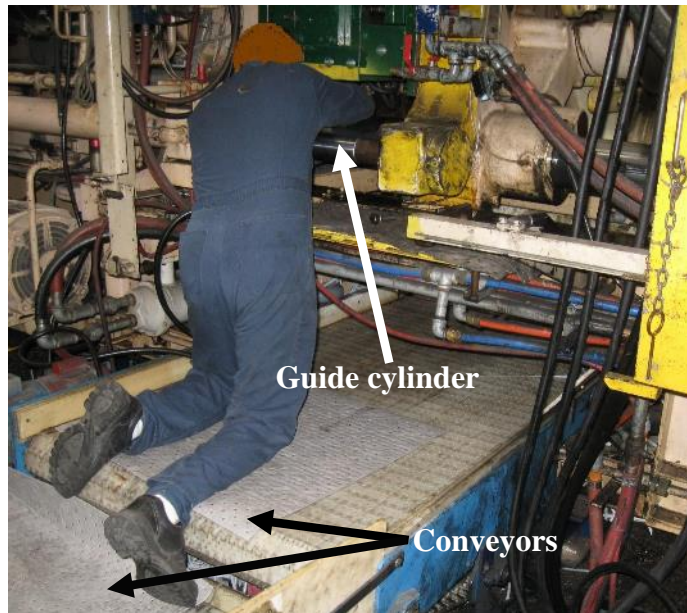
Worker installing a mould while kneeling on a conveyor.
